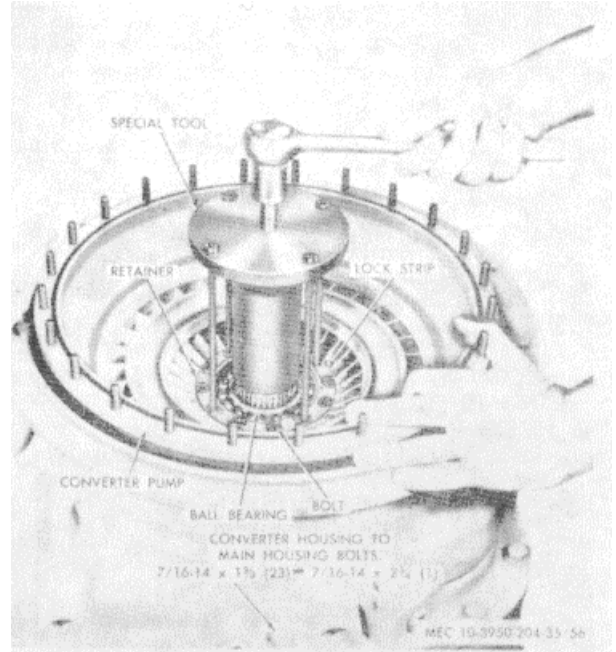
Removing converter pump, input accessory drive gear and bearing.
